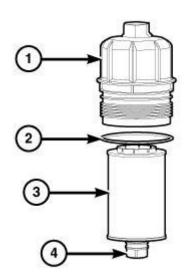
Oil Filter Housing Bleeder Screw Courtesy of CHRYSLER GROUP, LLC
